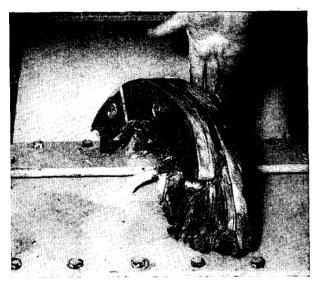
SECTION OF THE METASTREAM COUPLING SHOWING THE SHEARED BOLTS
